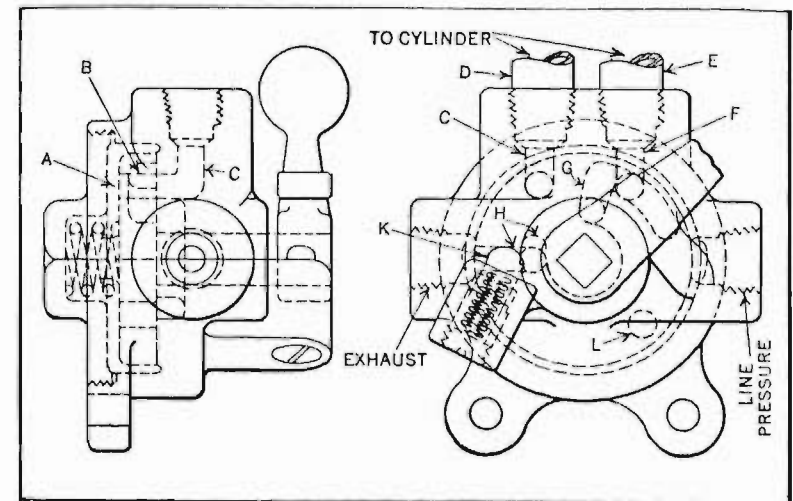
Pneumatic Valve by Means of which the Same Air is Used for Opening and Closing a Chuck
